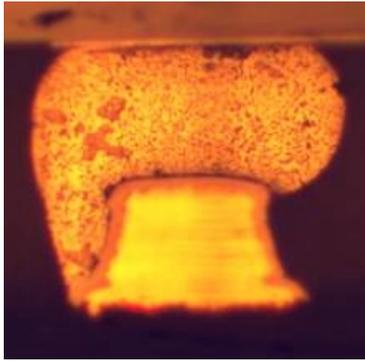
Poor Soldering of a Damaged Tin-Lead Bump With 1.0 mil Thick Flux
